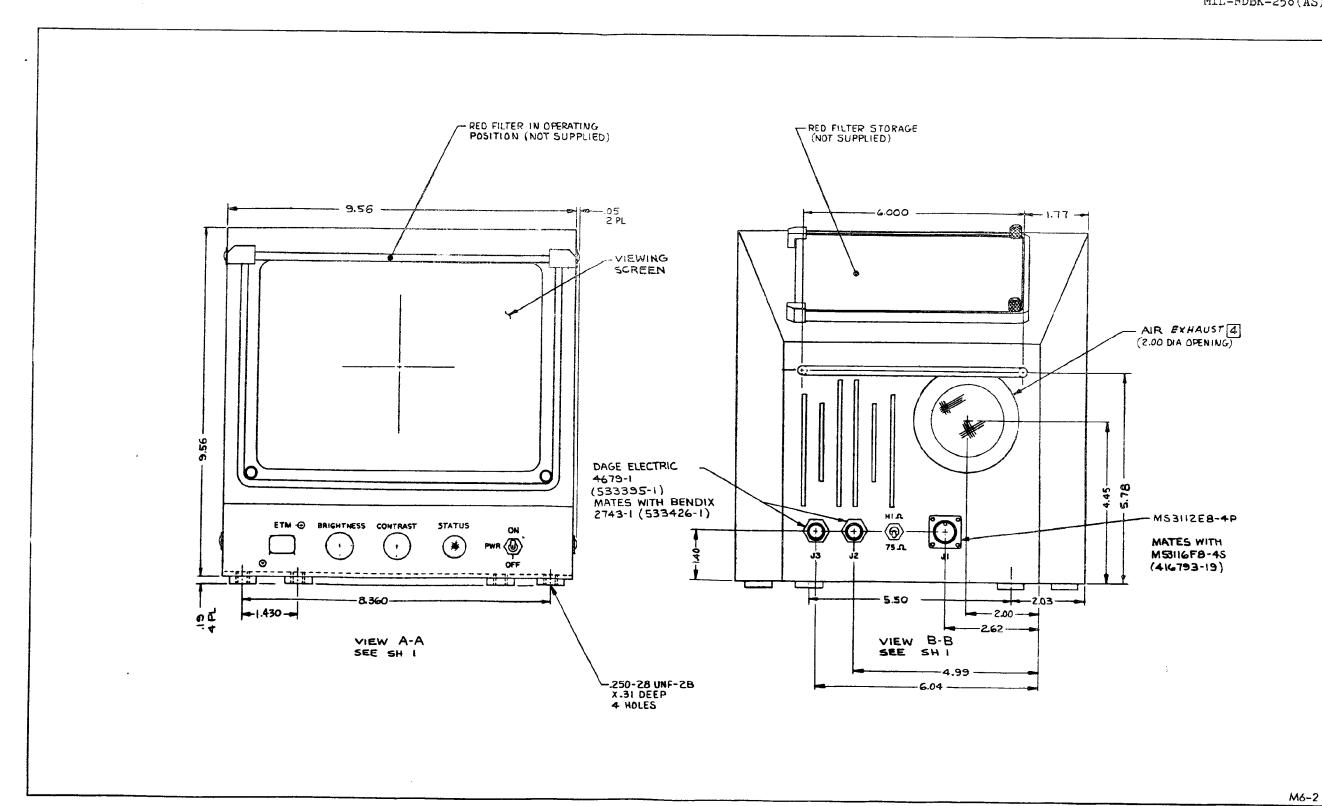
Indicator, video, outline drawing, (sheet 1 of 4)
